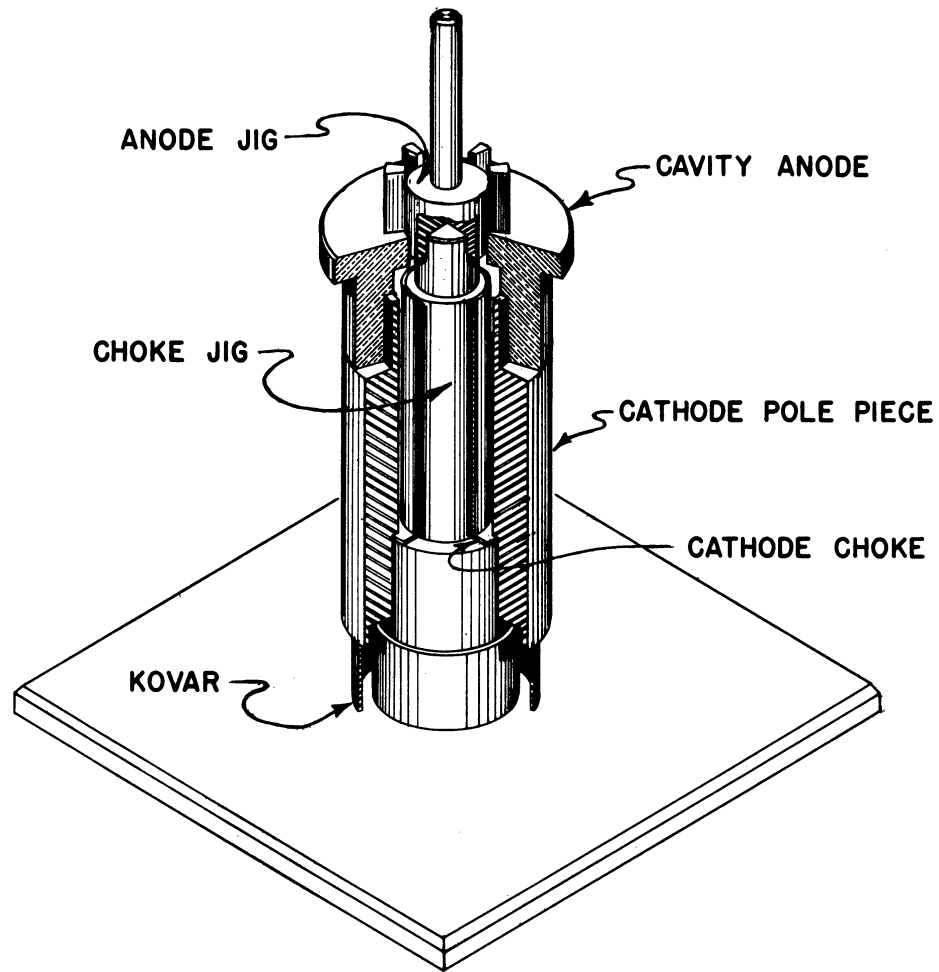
A LOWER ASSEMBLY OF 1<sup>st</sup>. BRAZE JIG
